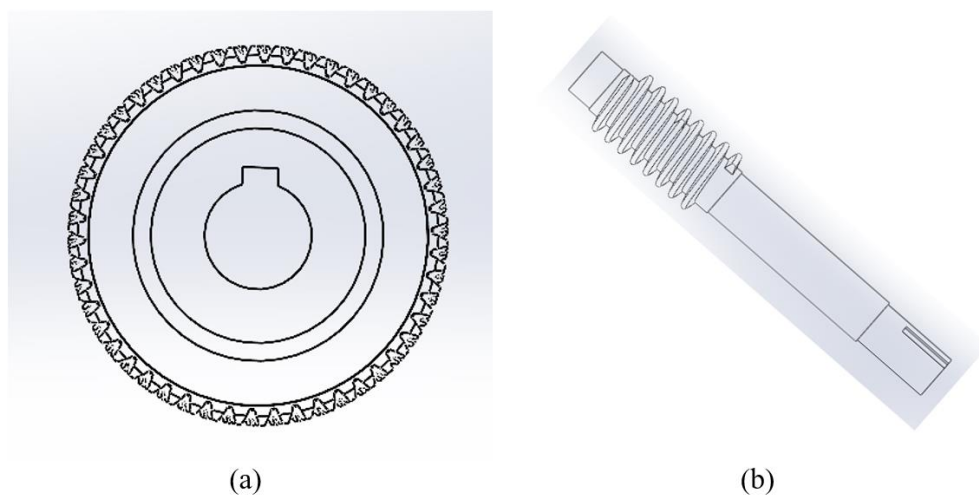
Drawing of a) Worm wheel and b) Worm gear
